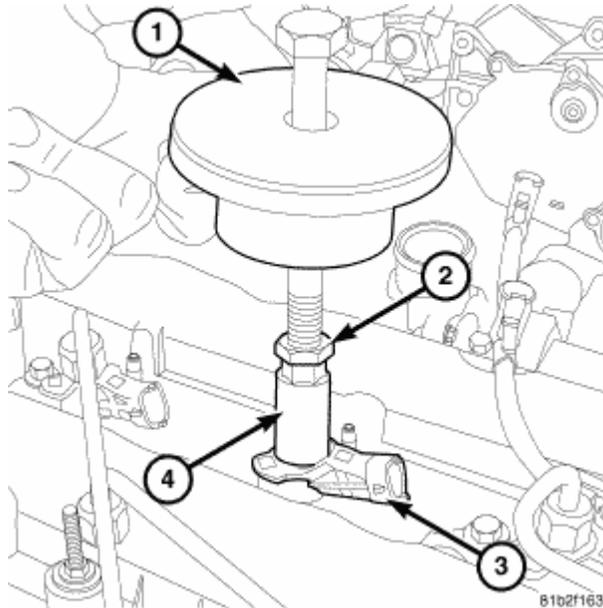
Installing Special Slide Hammer Tool #8941 Onto Special Tool #9552, Tightening Lock Nut & Removing Injector From Cylinder Head
